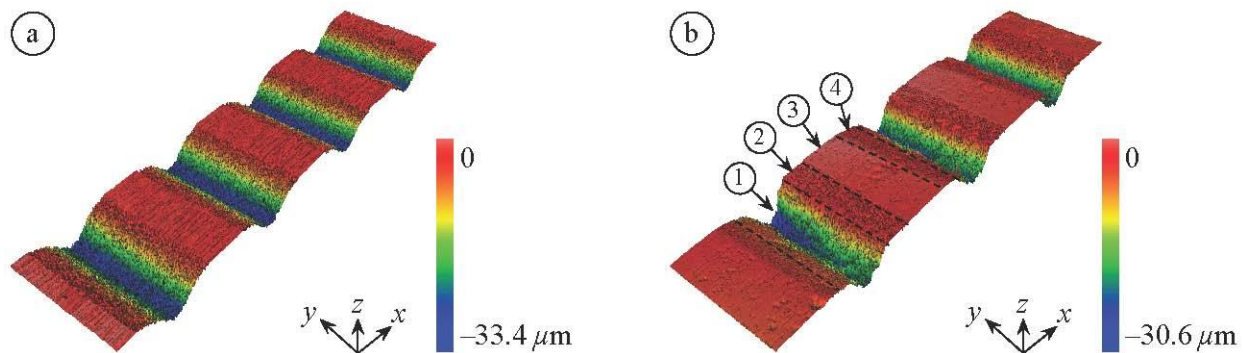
Illustration of strips surfaces before (a) and after (b) drawing.
